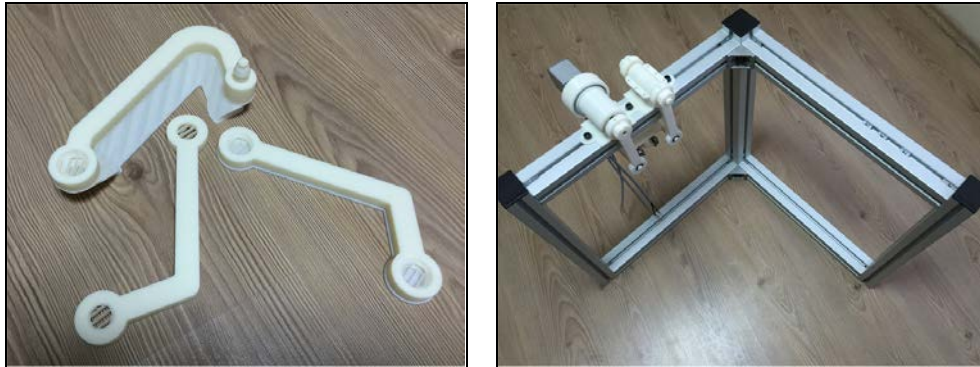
Manipulator Links that are Printed oh Rapid Prototyper and the Aluminum Manipulator Frame
